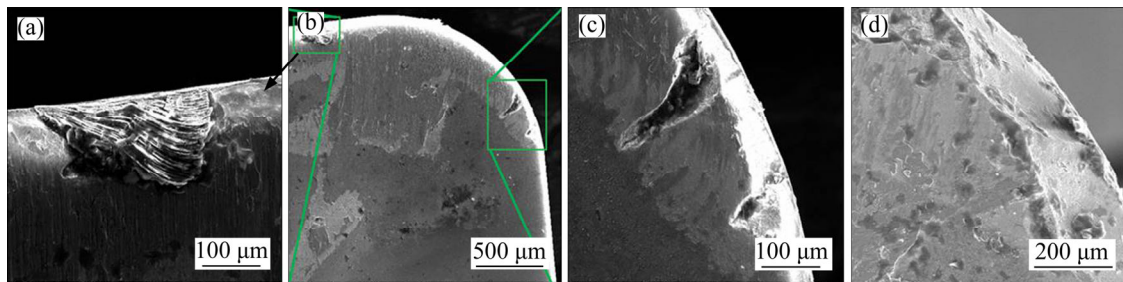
SEM images of tool rake face when using cutting speed of 95 m/min: (a) Micro BUE; (b) Tool rake face; (c) Micro breakage; (d) Failure
